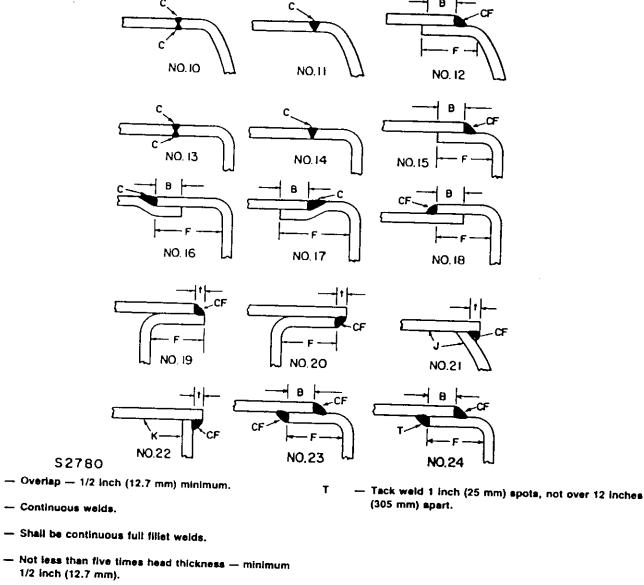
HEAD JOINTS FOR ALL DIAMETER TANKS
